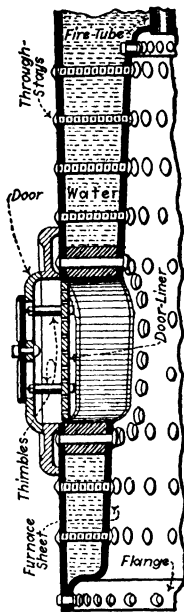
Furnace sheet flanged to close water-leg at bottom.
